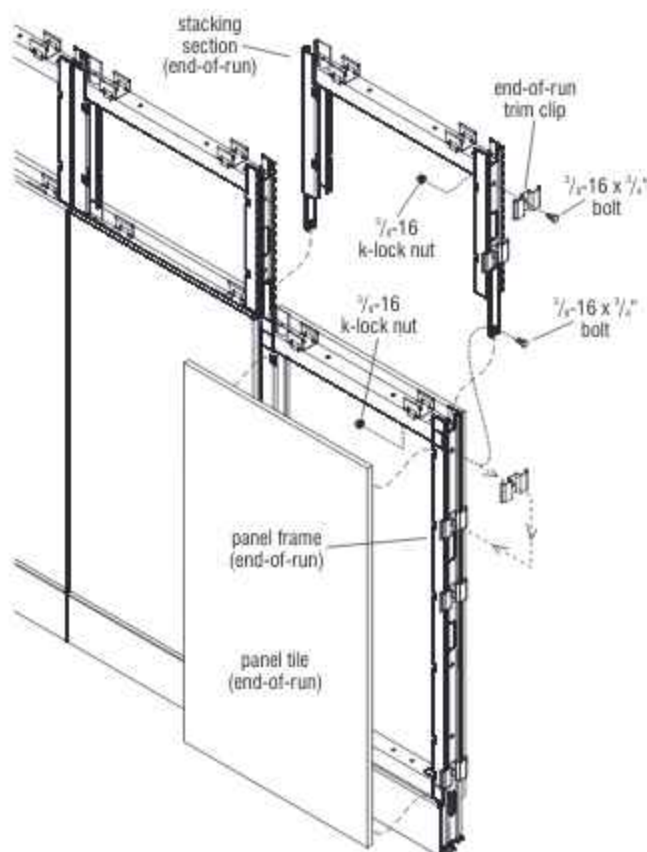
Stacking Sections (steel frame) - End-of-Run Vertical Stacking Post Assembly
